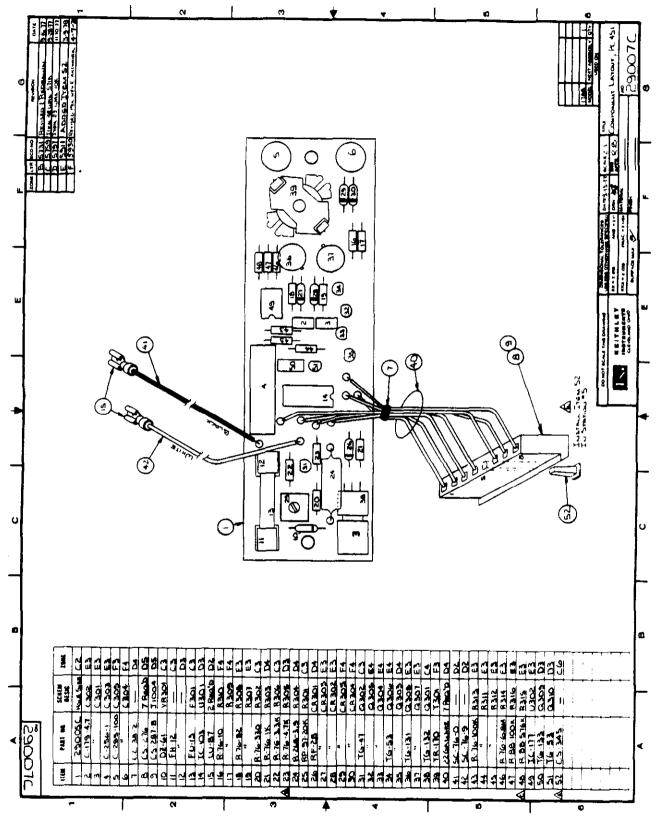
Component Layout, PC-451, Battery Pack Board.
